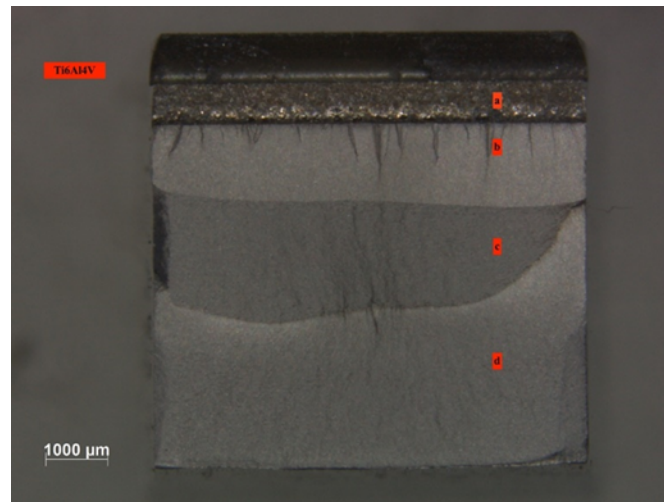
Fracture surface Ti grade 5 SE(B) specimen.
